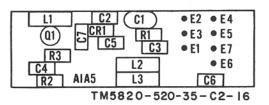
Receiver-Transmitter, Radio RT-662/GRC, internal alc assembly 1A1A5 parts location diagram.
